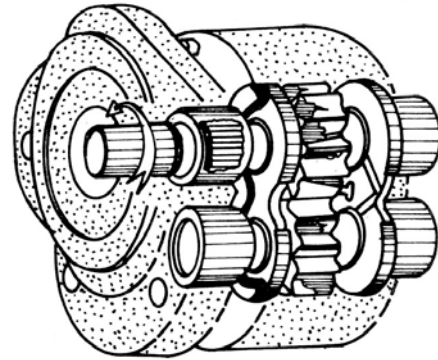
Example of compensation surface a bearing bushing and bedding in a cover
